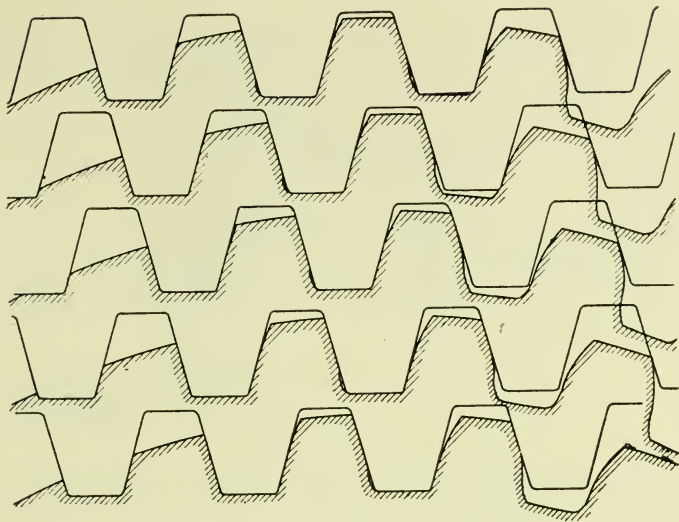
OUTLINE OF A GEAR PRODUCED BY THE HOBGING METHOD
